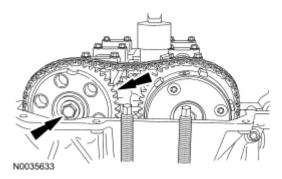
Locating Timing Chain On Intake Camshaft Drive Gear Courtesy of FORD MOTOR CO.
